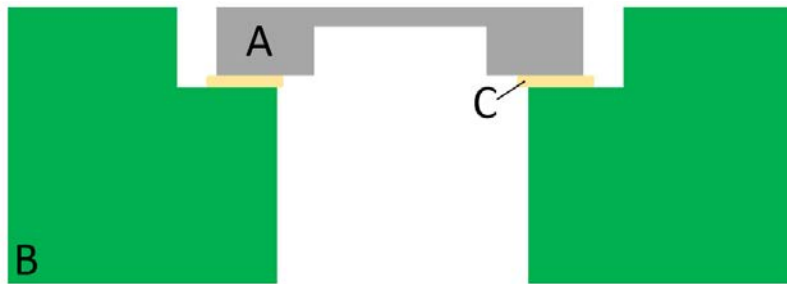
Cross Sectional Schematic View of Open Back Sensor (A) on PCB (B) with UV Glue (C). Adapted from [14].
